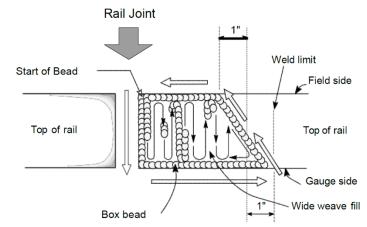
Example of Welding Bead Pattern and Minimum Weld Offset
